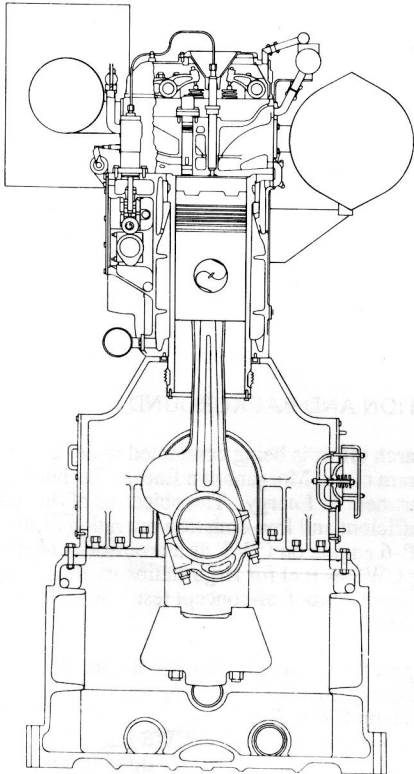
Cooper-Bessemer LSB Engine Cross Section
